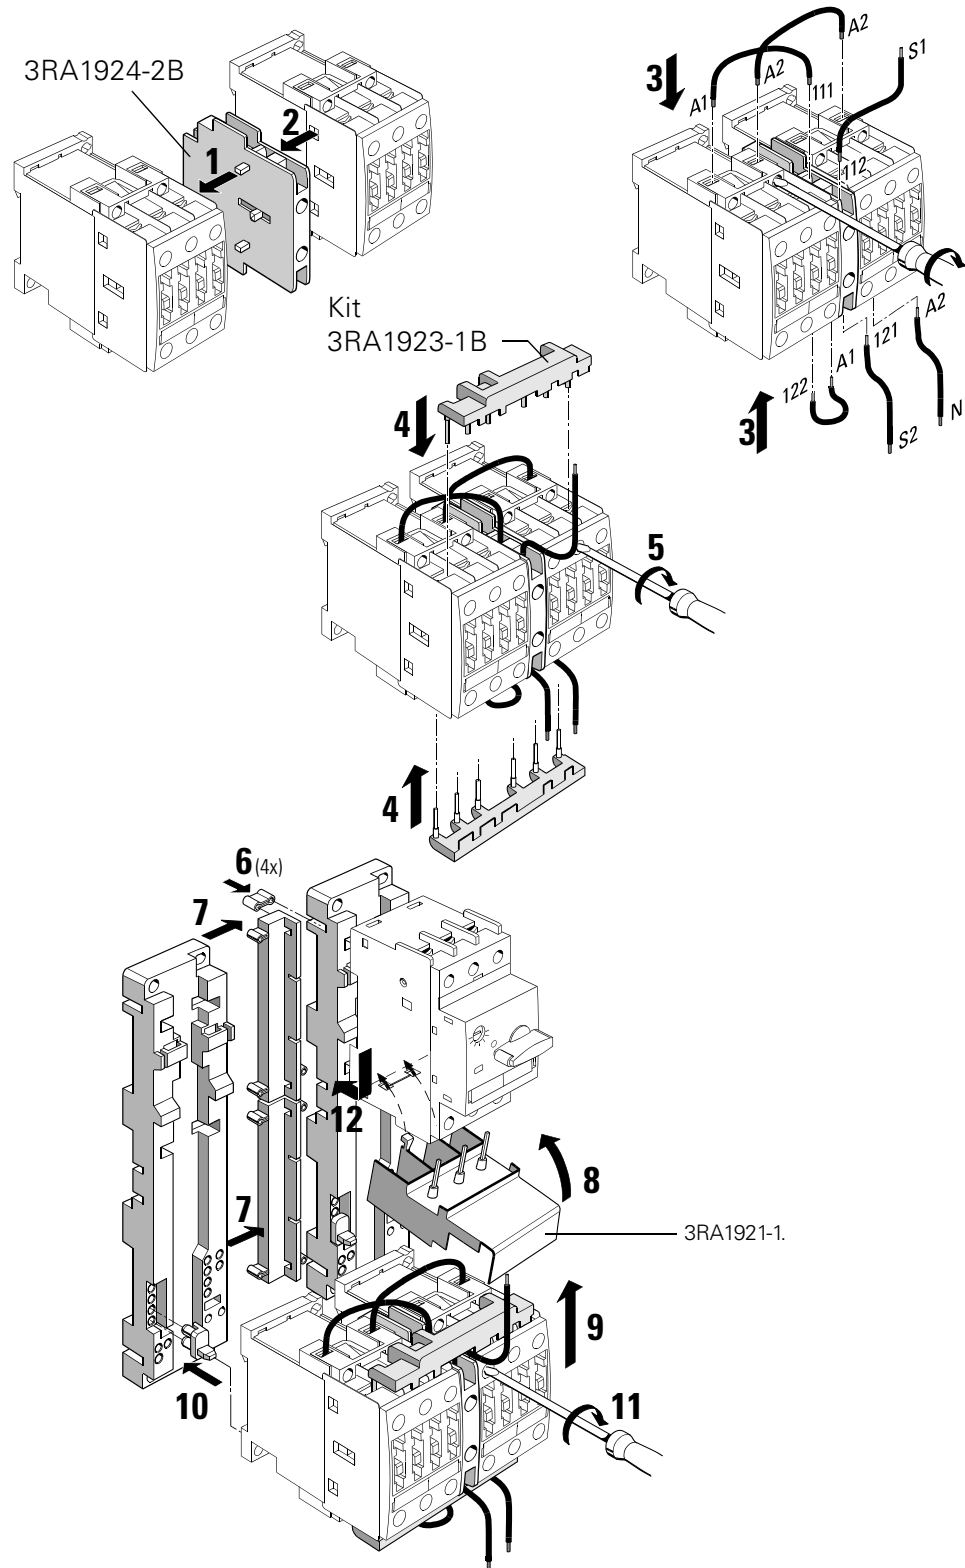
Self-assembly, rail, reversing operation (frame size S0)
